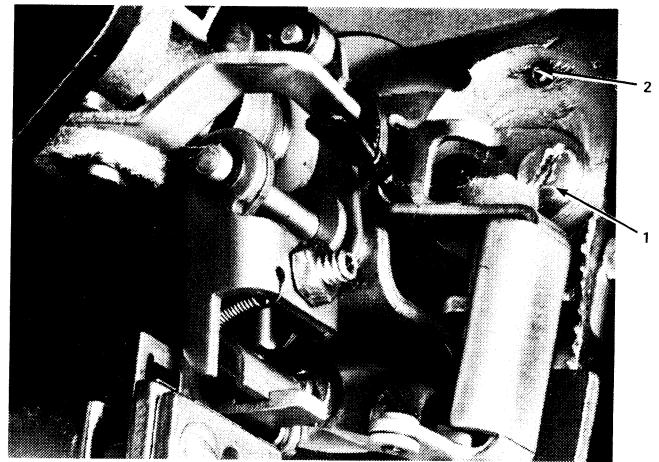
Keyboard Removal (Front, Left Corner of Printer)
